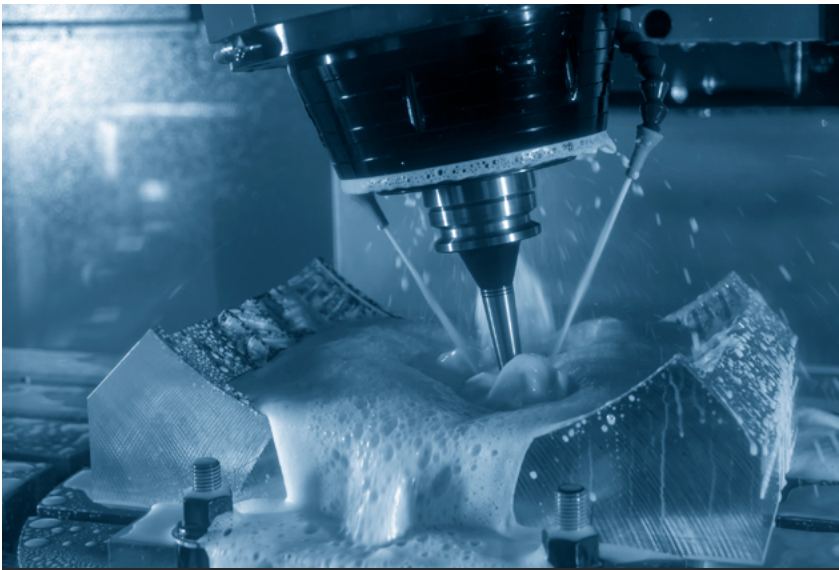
/06 The impressive reach of a 5-axis CNC milling machine enables intricate 3d details to be fabricated.
